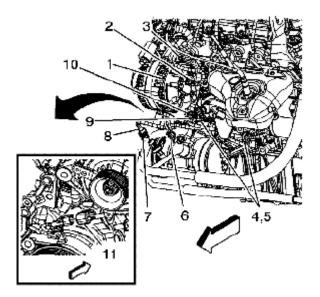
Identifying Cylinder Head Engine Electrical Wiring Harness Connector Courtesy of SUZUKI OF AMERICA CORP.
